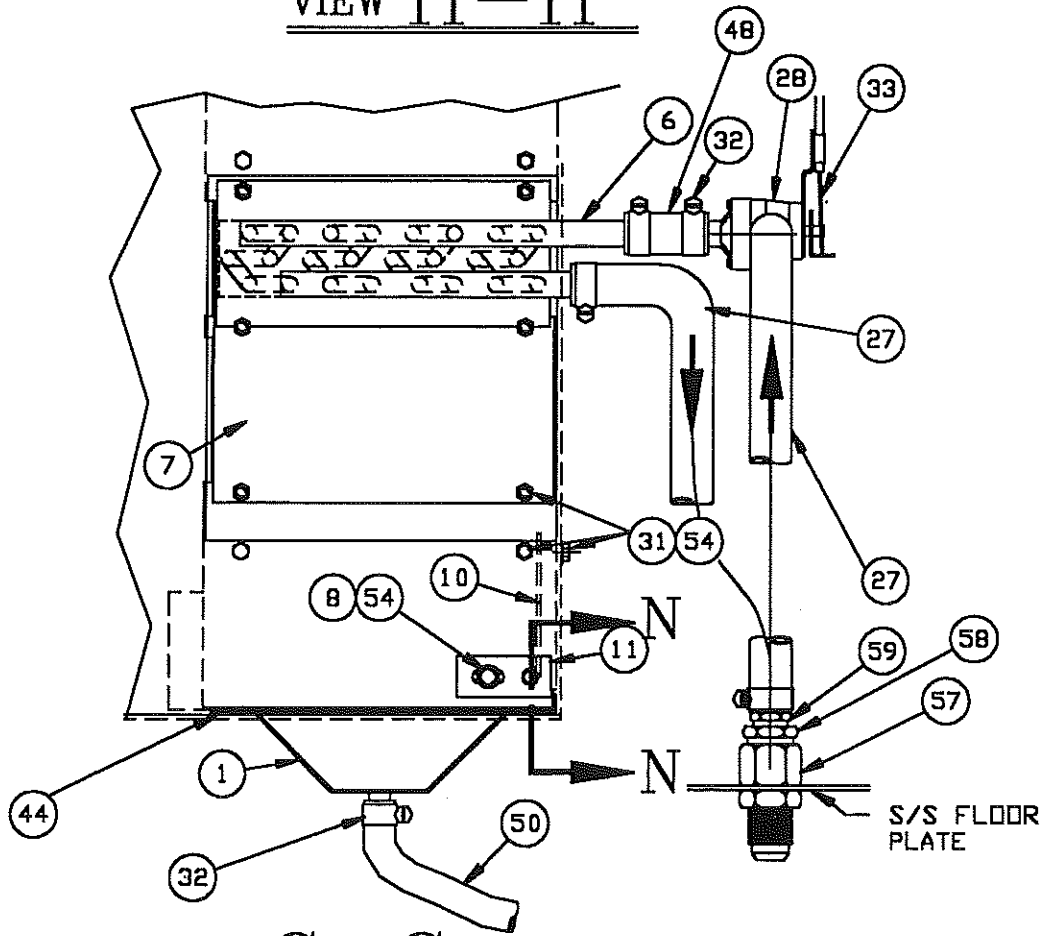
CAB HEATER ASSEMBLY - SHEET 2 OF 7
